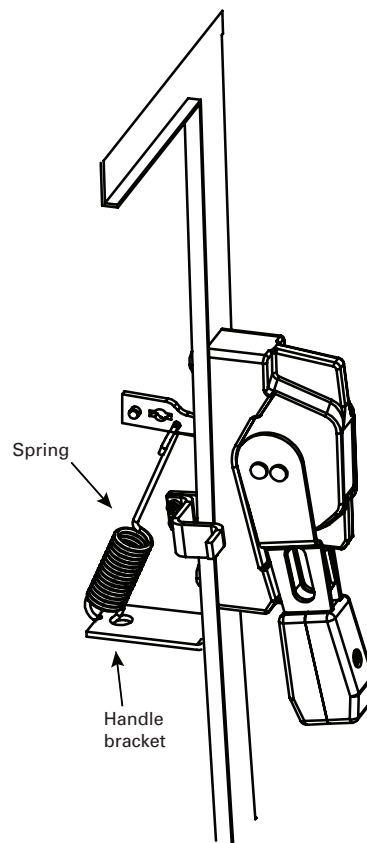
The spring attaches between the handle bracket and handle as shown. Install spring after adjusting threaded rod in Part 3, Step 5.
